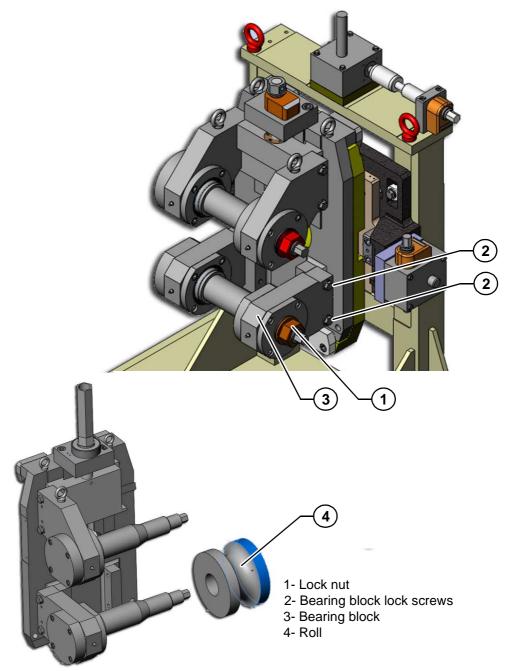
L Assembly scheme of roll locking ring nuts according to line work direction
